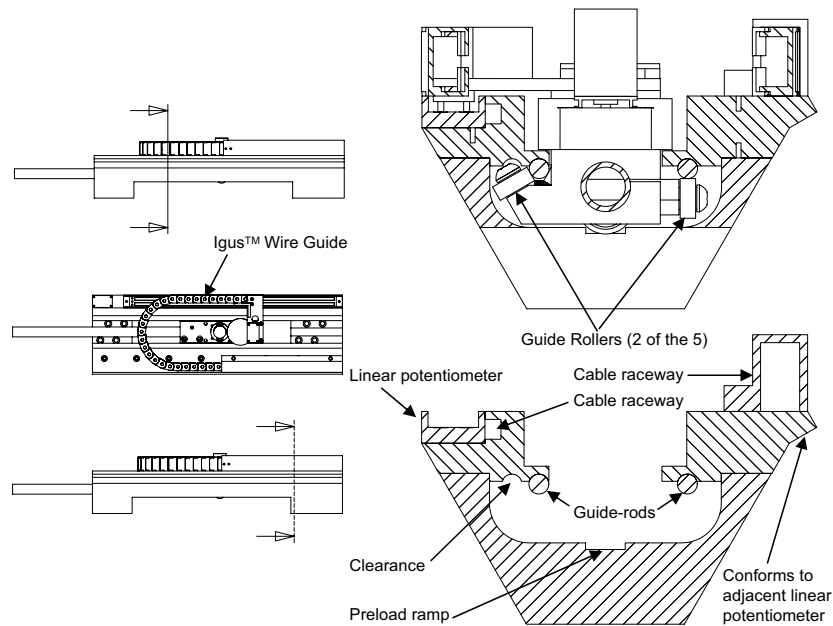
Shown is one of six identical actuator assemblies. The proximal link is grounded to a carriage on a linear guideway. An Igus™ flexible wire guide manages wiring for the steering motor and encoder. A ramp allows the carriage to be inserted between the guide-rods and cylinder, with the spacing decreasing gradually as the CVT wheel approaches the cylinder. This allows the application of a preload force by compressing springs within the steering bell (see Figure 10).
